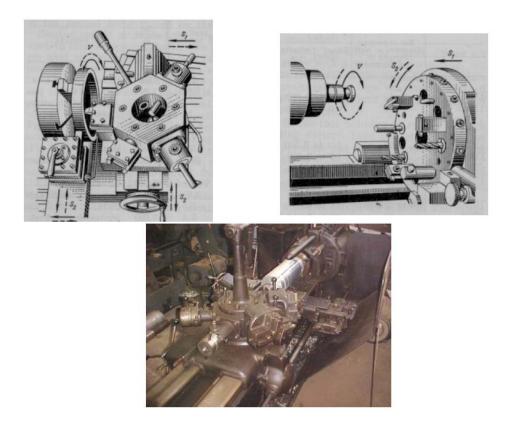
Mounting of cutting tools on the turret in semiautomatic lathe.
